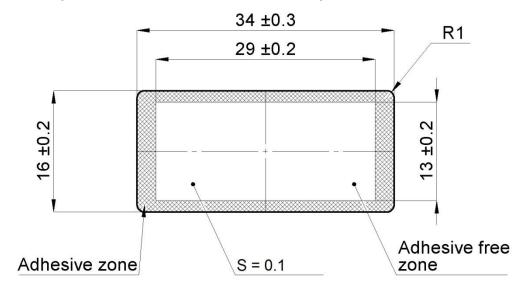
Dust filter outline (all dimensions are in millimeters)
